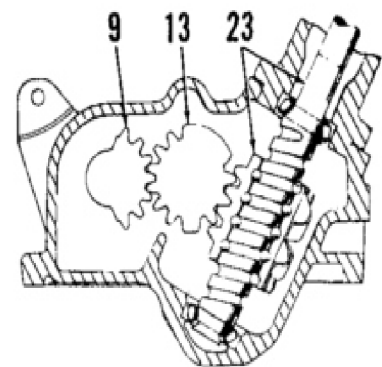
Cross-sectional view of manual steering gear assembly showing correct installation of sector gears and wormshaft assembly. Refer to Fig. 3 for exploded view and parts identification.
